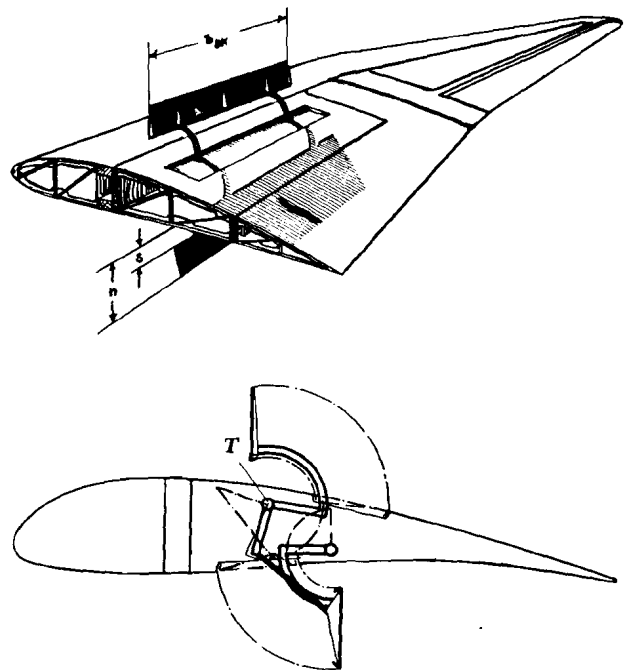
Rotating type of dive brakes shown in the extended position. T is the torque tube by which they are operated.
